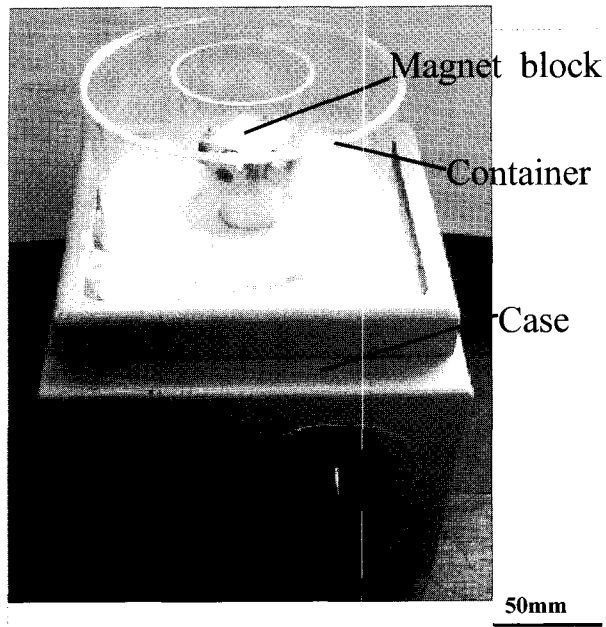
Magnetic barrel machine with a three-dimensional magnet arrangement
